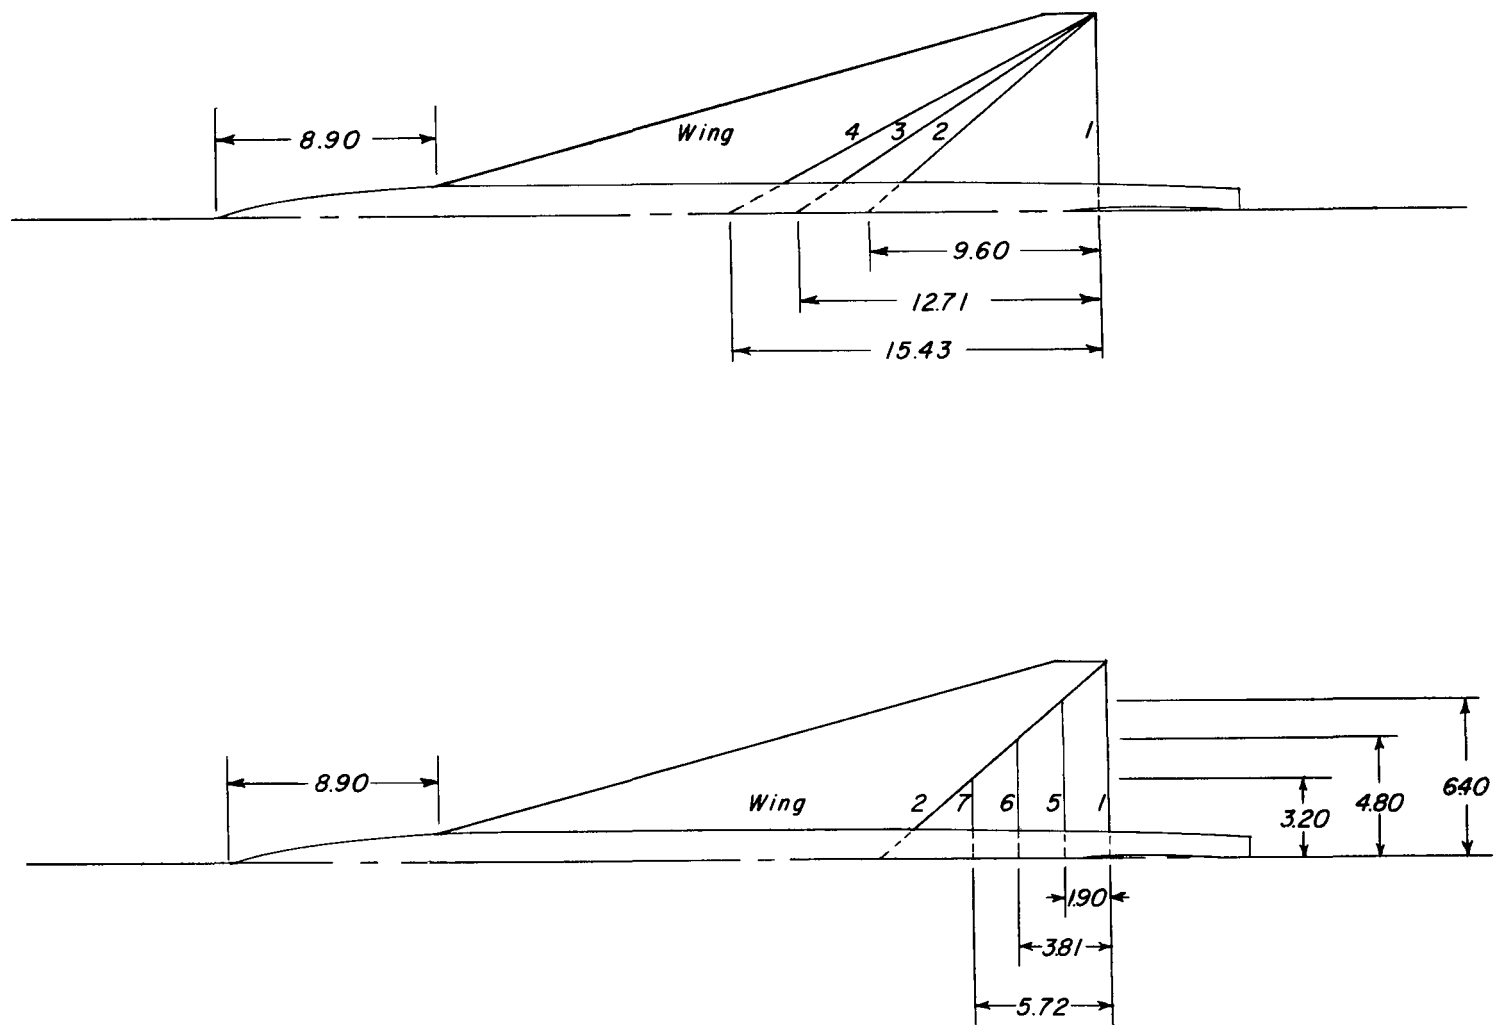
Geometric dimensions of wings 1 to 7. All dimensions are in inches.
